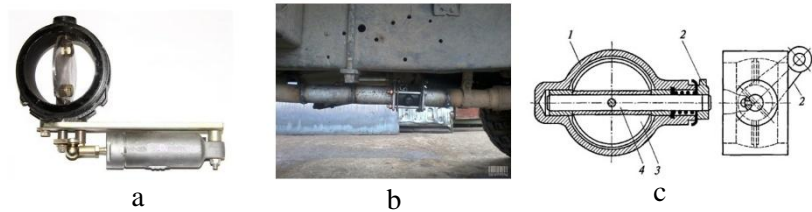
Motor brake: motor brake with a shutter and the pneumatic cylinder of controlling (a); the motor brake established in the exhaust pipeline (b); the drawing of the case with a shutter: 1 – case; 2 – rotary lever of a shutter shaft; 3 – shutter; 4 – shutter shaft
